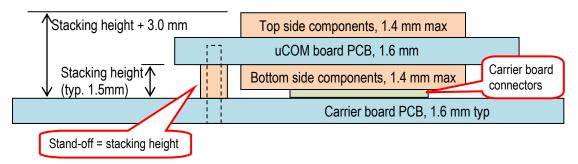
uCOM Board Mounting on Carrier Board, Stacking Height
